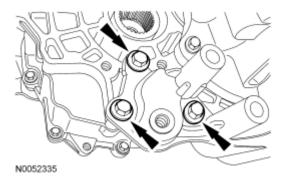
Locating Driveshaft Aside Bolts Courtesy of FORD MOTOR CO.
